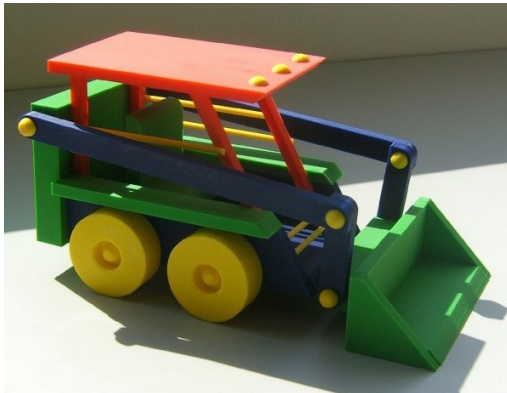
An Assembled Toy Made of Rapid-Prototyped Parts
